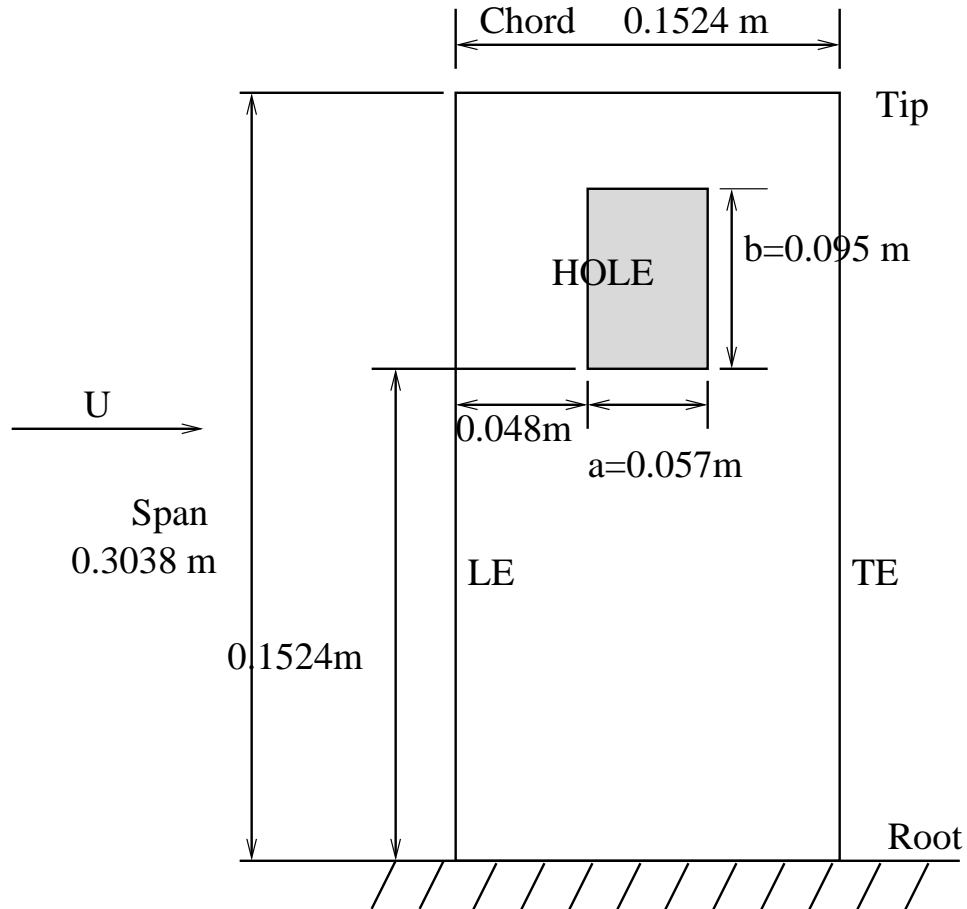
Dimensional drawing of rectangular wing with hole near tip
